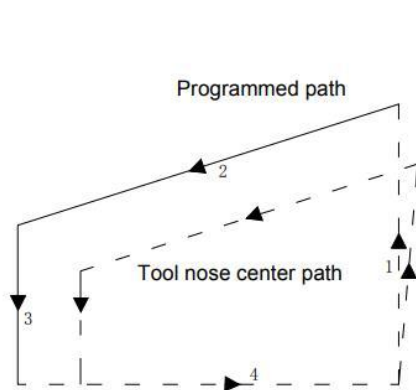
Offset direction of G90 tool nose radius compensation
